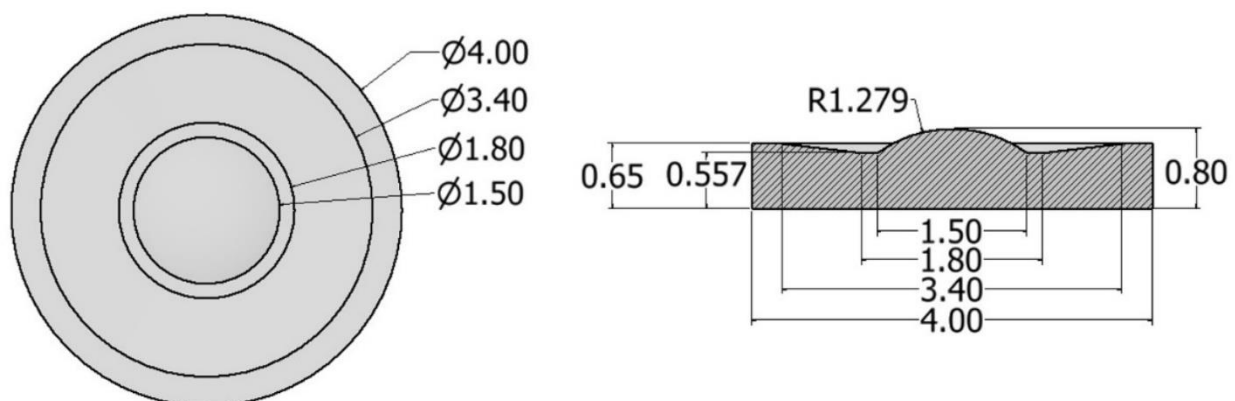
Carrier material for lenses when 2-part mould was used. (1.5 mm focal length, 1.5 mm diameter lens is shown).
